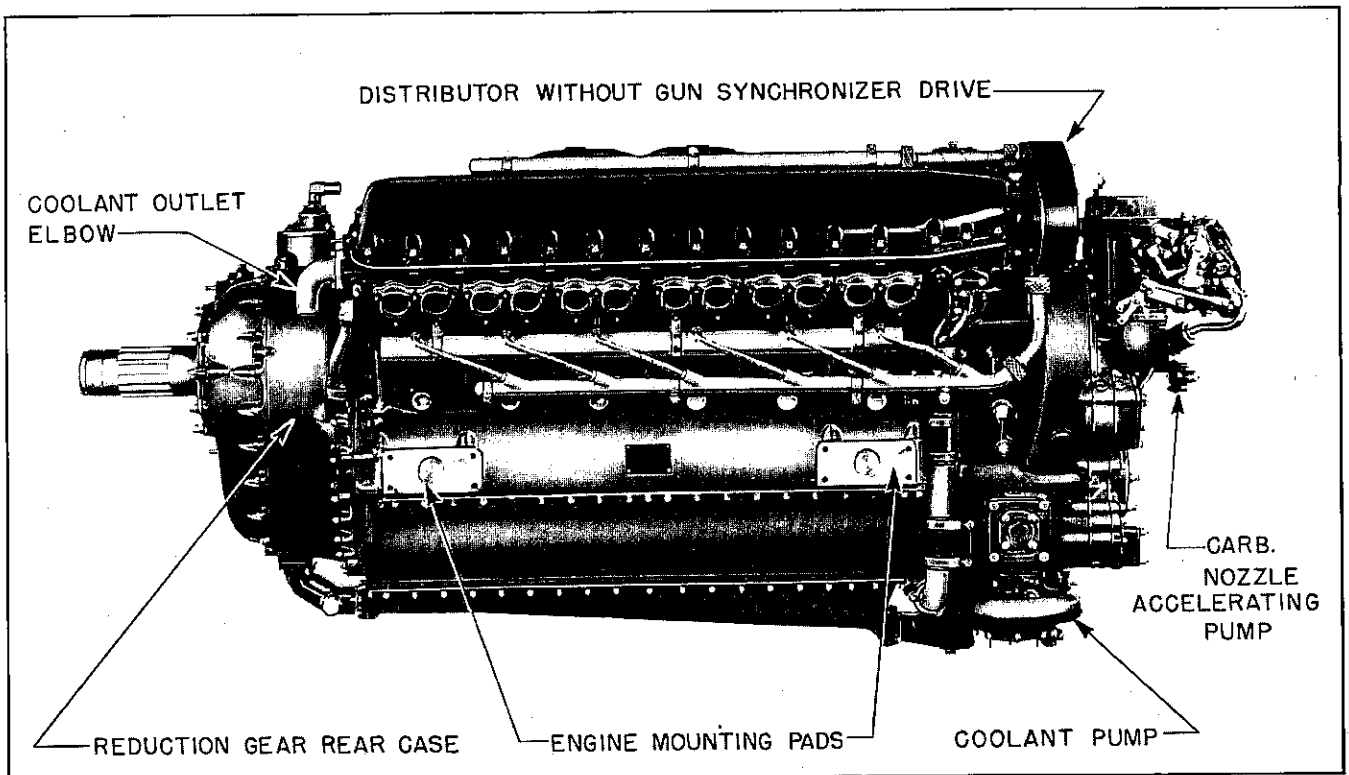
Left Side View of V-1710-F5R or F5L Model Engine.
